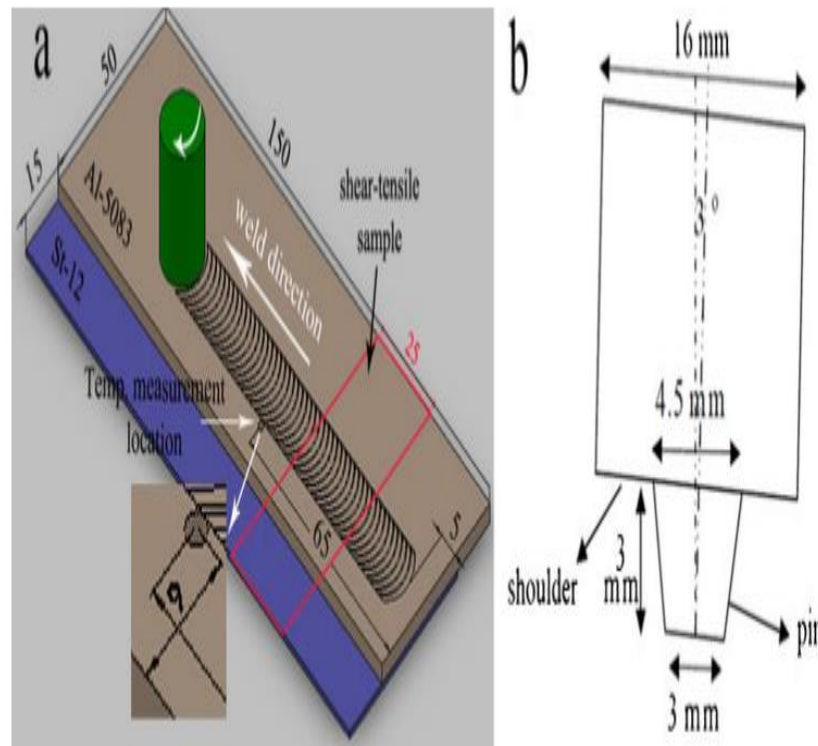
(a) a diagram of the joint design showing the locations where interface temperatures were measured, with dimensions in millimeters; (b) a schematic illustration of the welding tool configuration.
